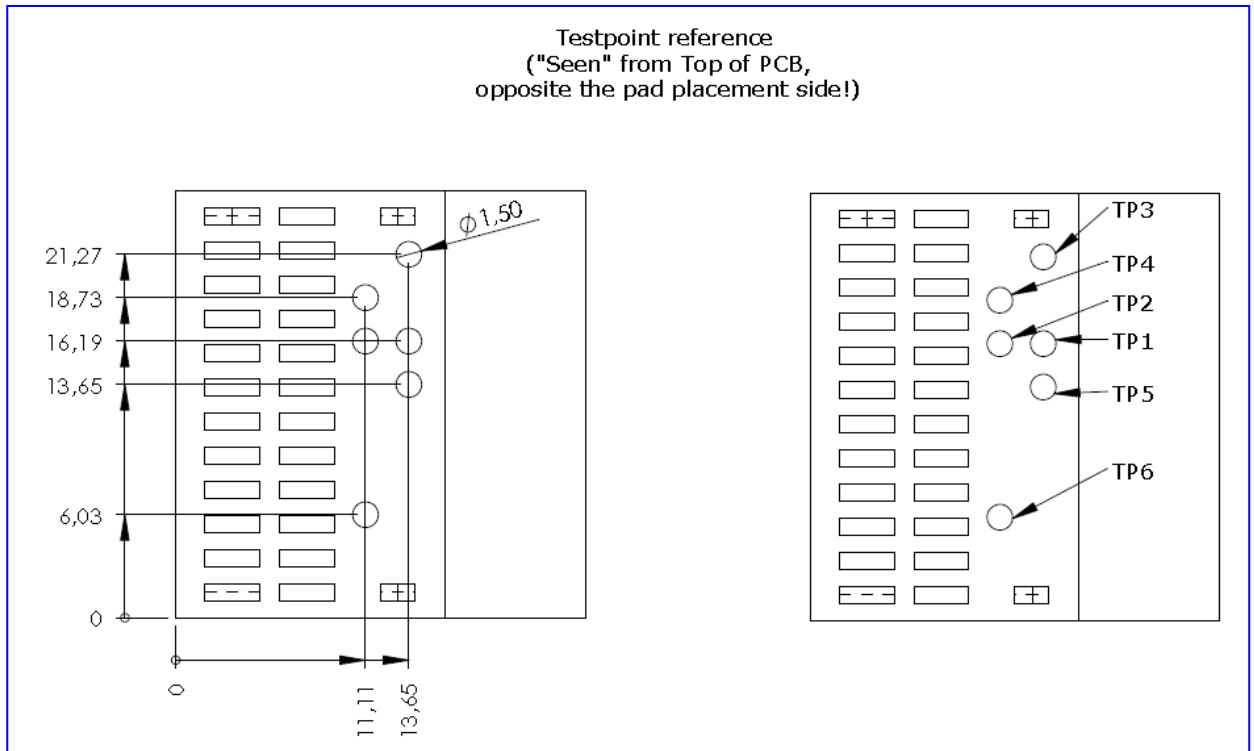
Test points for the DevCom 06 ZigBee Module
